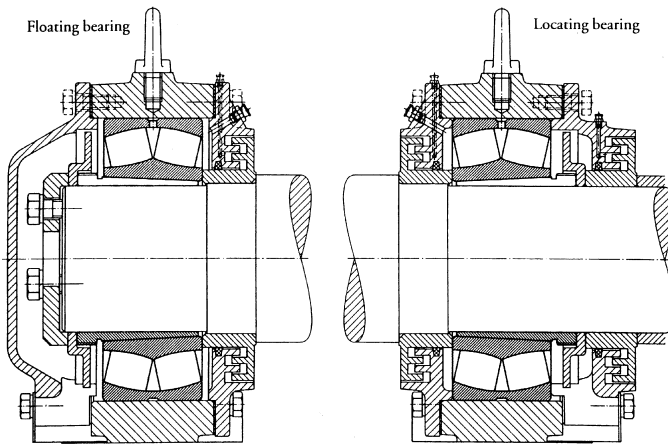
Bearing housing of a double-shaft hammer mill (from FAG, 1986, with permission of FAG and Handel AG).
